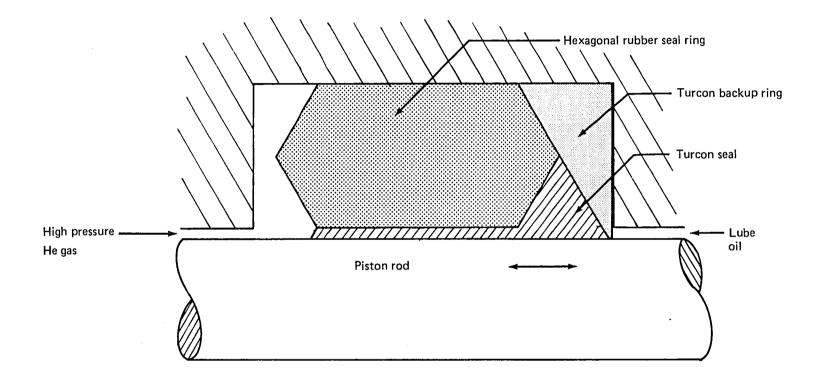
Bell Seal Configuration–Three-Piece Foot Seal
